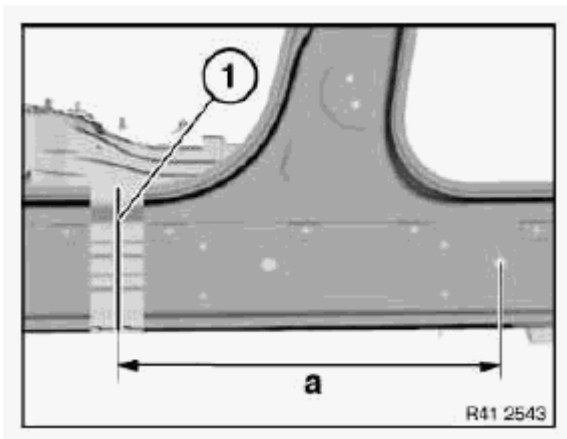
Mark Severance Cut Dimension (Before Hole Dia)
